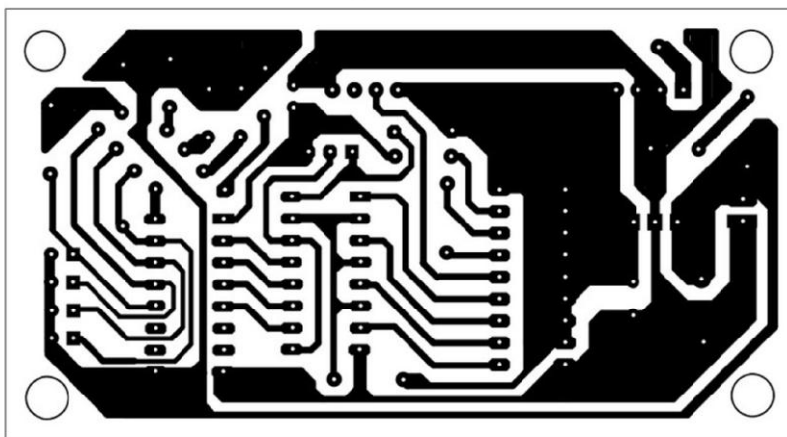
An actual-size, single-side PCB layout of receiver circuit for wireless equipment control
